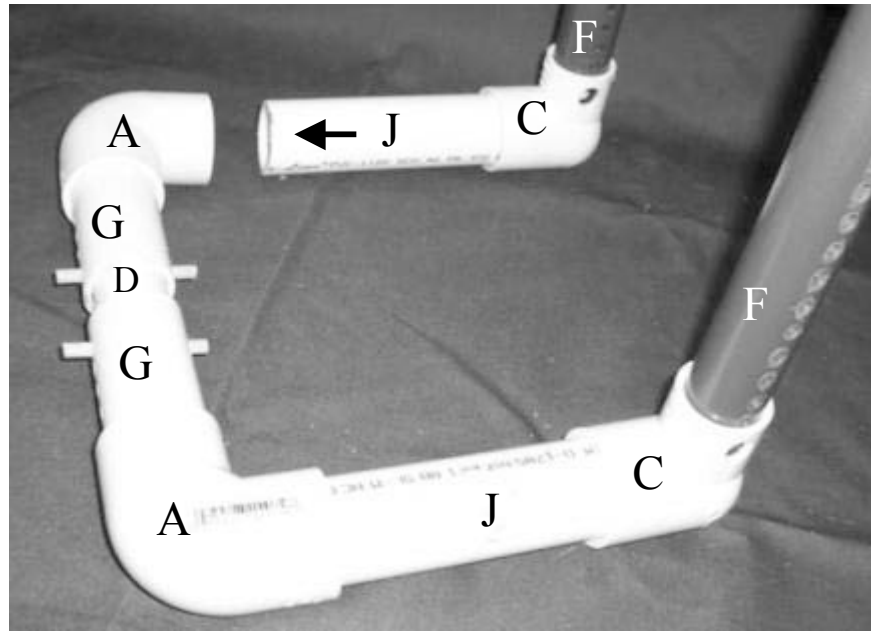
Step 17 – Joining Side Frame to Rear Frame.
